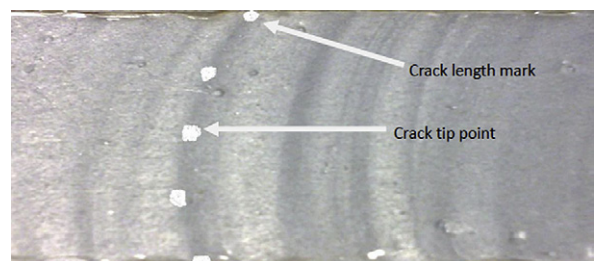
Crack length marks and crack tip points of a fractured adherend.
